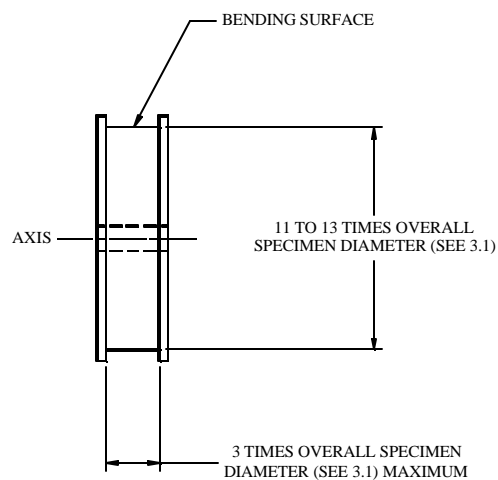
Edge view of either sheave for the bending apparatus of the cold working (minus 20°C) test.
